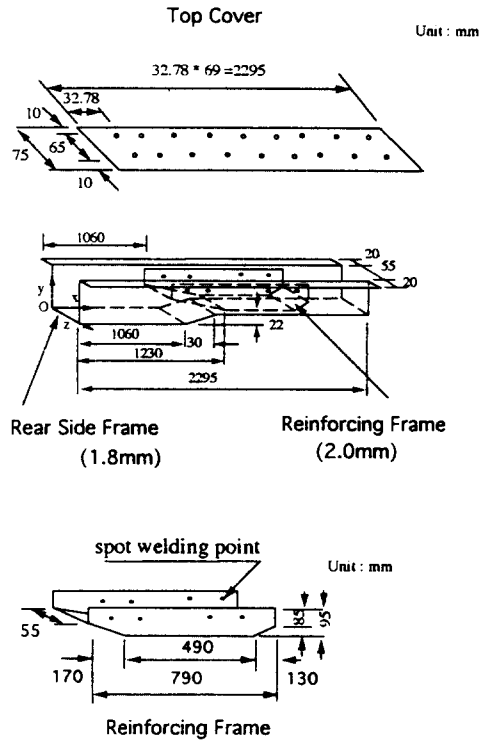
Geometry and dimensions of the reinforced spot welded underframe.
